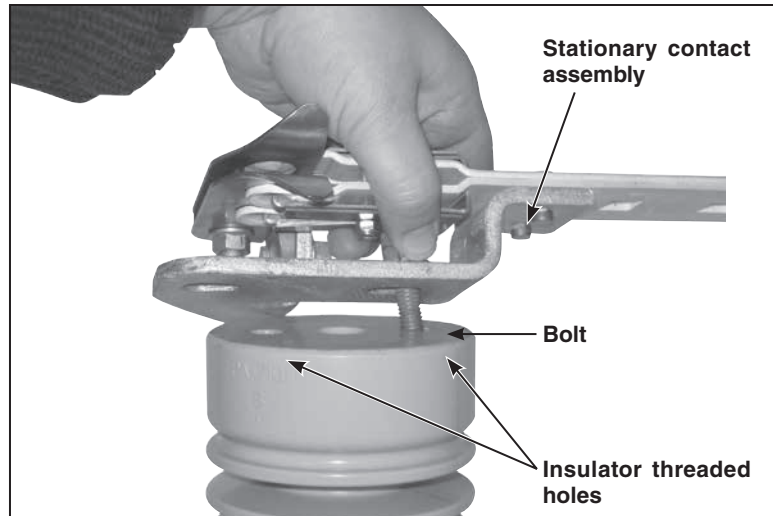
Align the outer bolt and hand-tighten until there is enough clearance to slide the mounting bracket.
